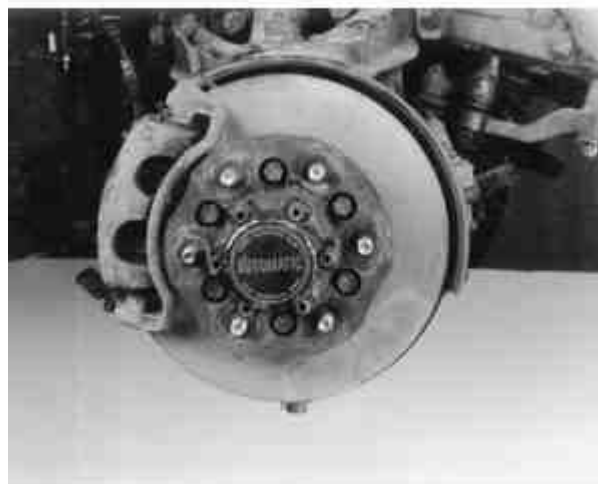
Remove the auto lock hub housing retaining bolts, first using a torx® socket
